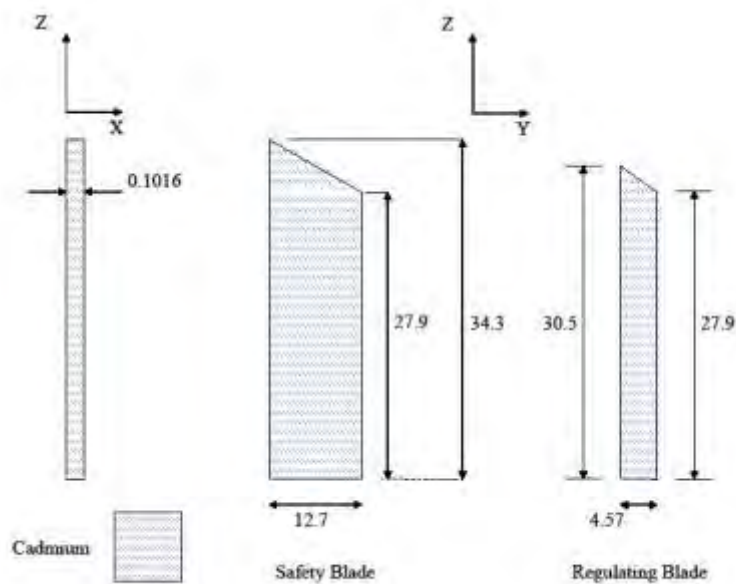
UFTR Control Blade Cadmium Insert Dimensions [cm]
